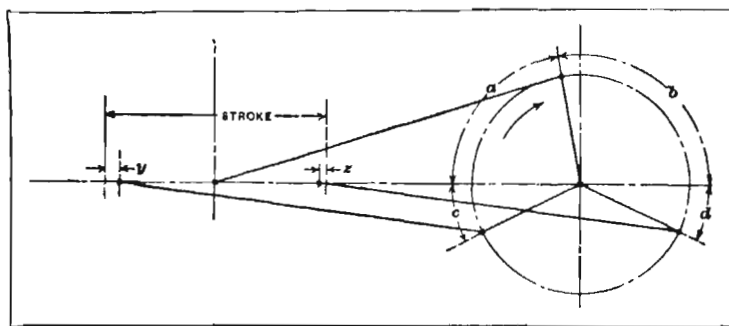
Diagrams Showing Relative Motions of Crankpin and Cross-head
